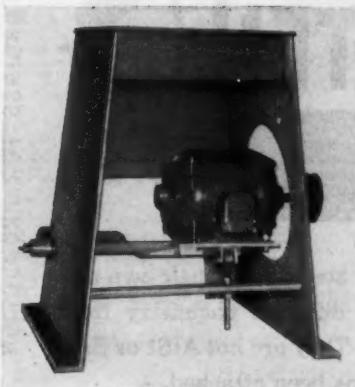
Simplified, welded construction is made by using sheared plate.
